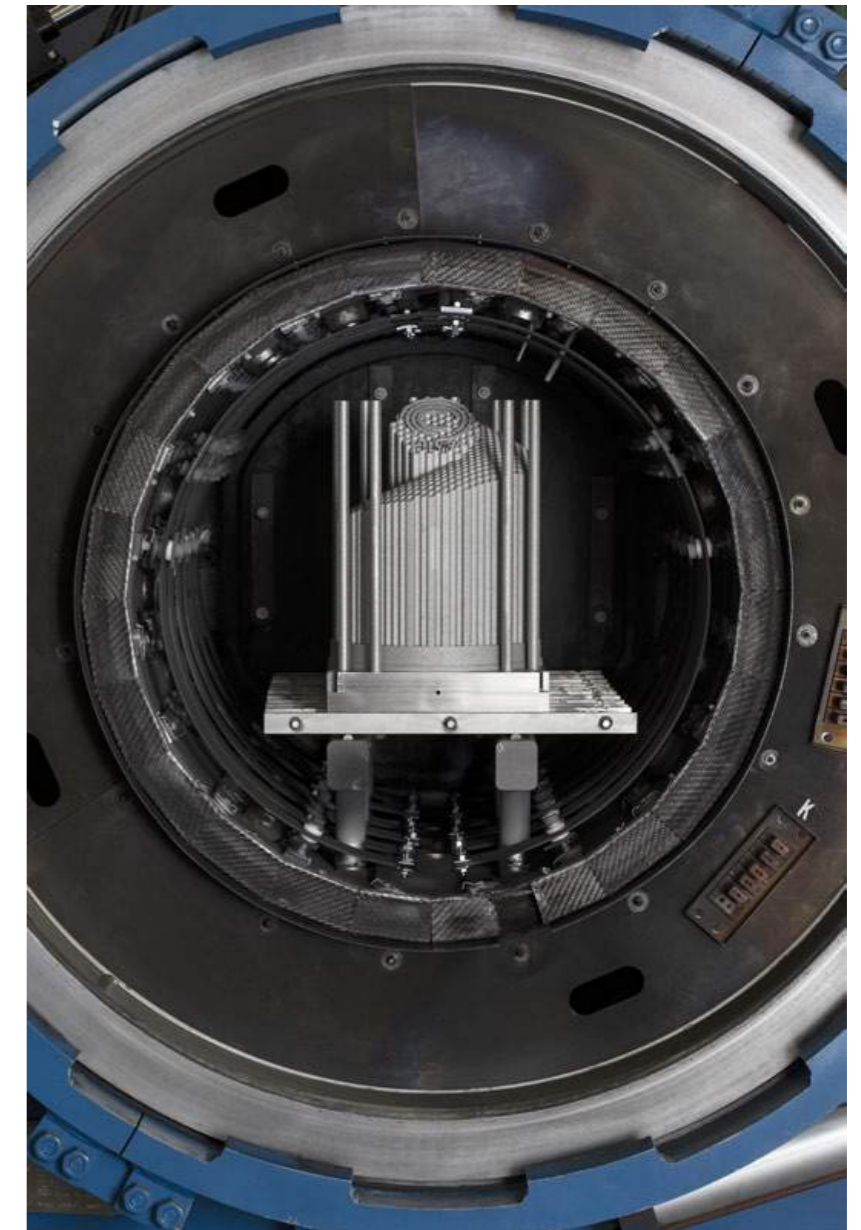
A vacuum heat treatment furnace at Carpenter's Additive Manufacturing Technology Center (AMTC) in Reading, PA, USA
